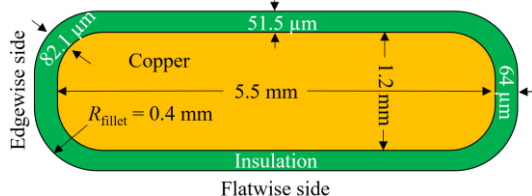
Dimensions of the cross-section of edgewise insulated wire.
